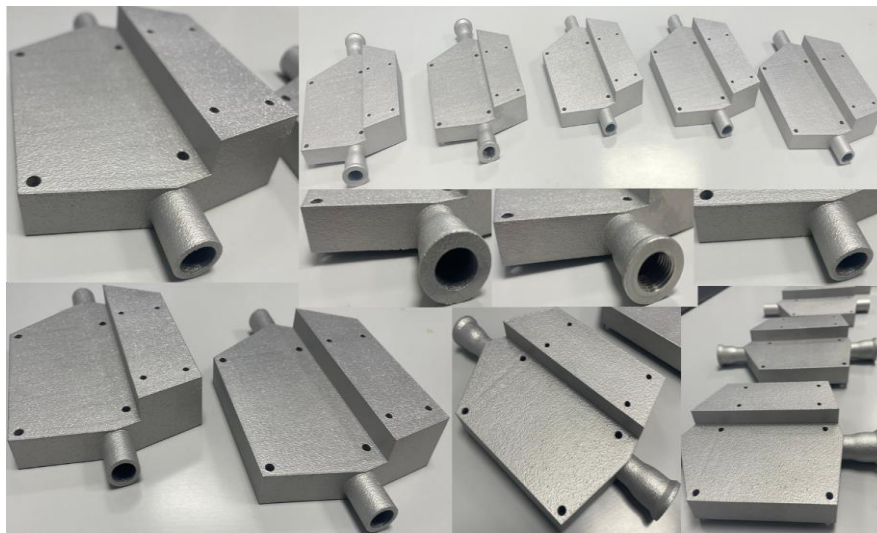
Printed aluminium high-power, liquid-cooled heatsink heatsinks prepared for testing at BOSMAL and AIT.
